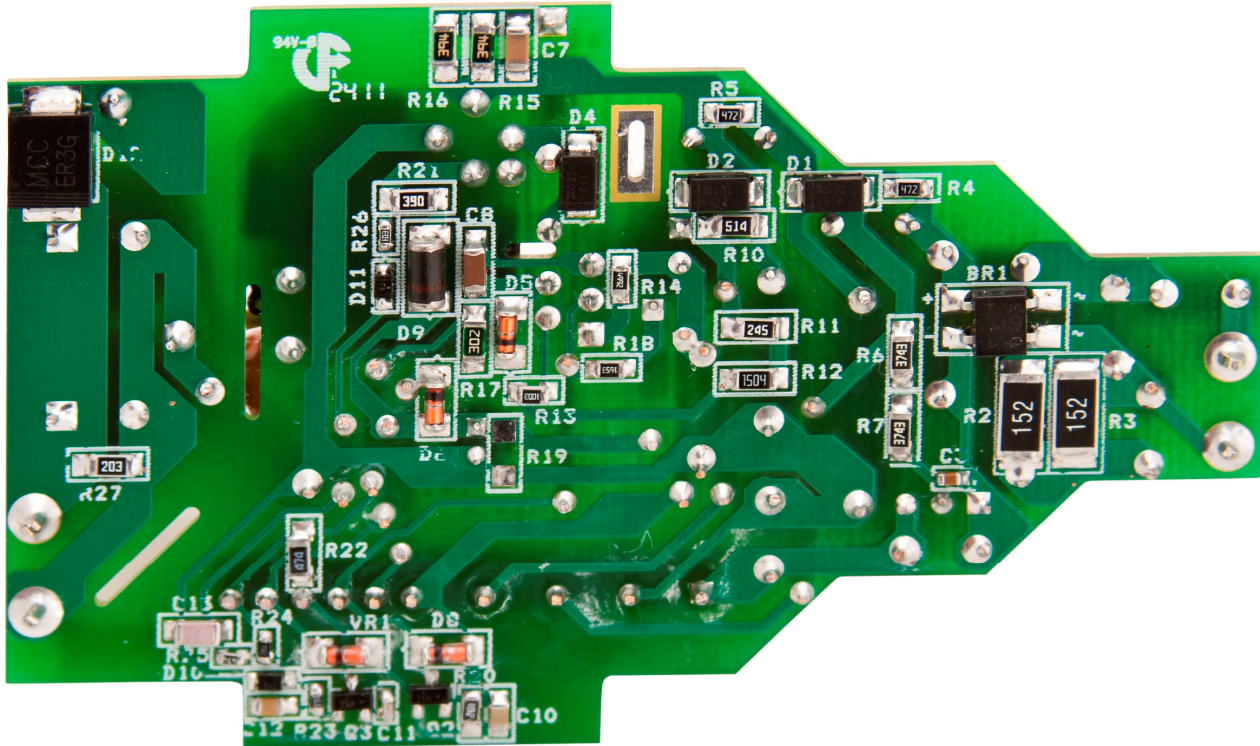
Populated Circuit Board Photograph (Bottom View).
